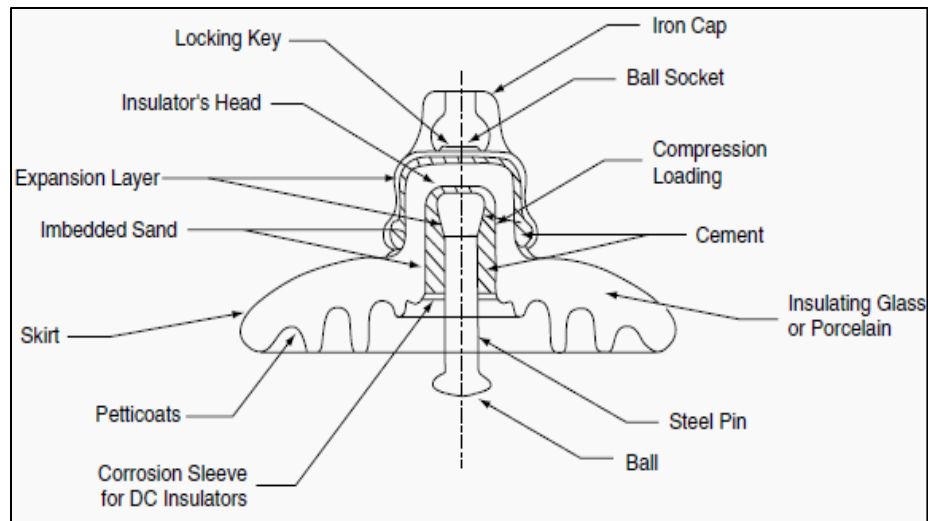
Cross-section of a standard ball-and-socket insulator
